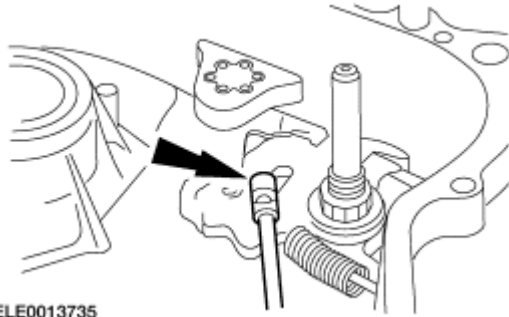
Parking Lever Actuating Rod & Parking Cam Actuator Lever Assembly
